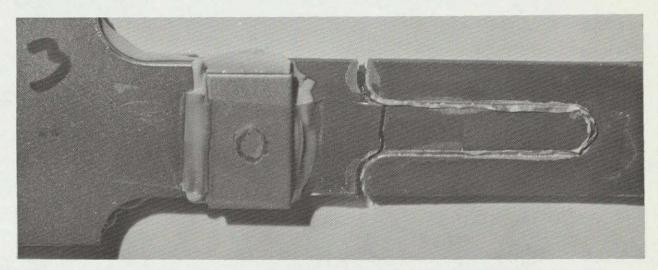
BRAZED FINGER JOINT; SPECIMEN NUMBER 3
